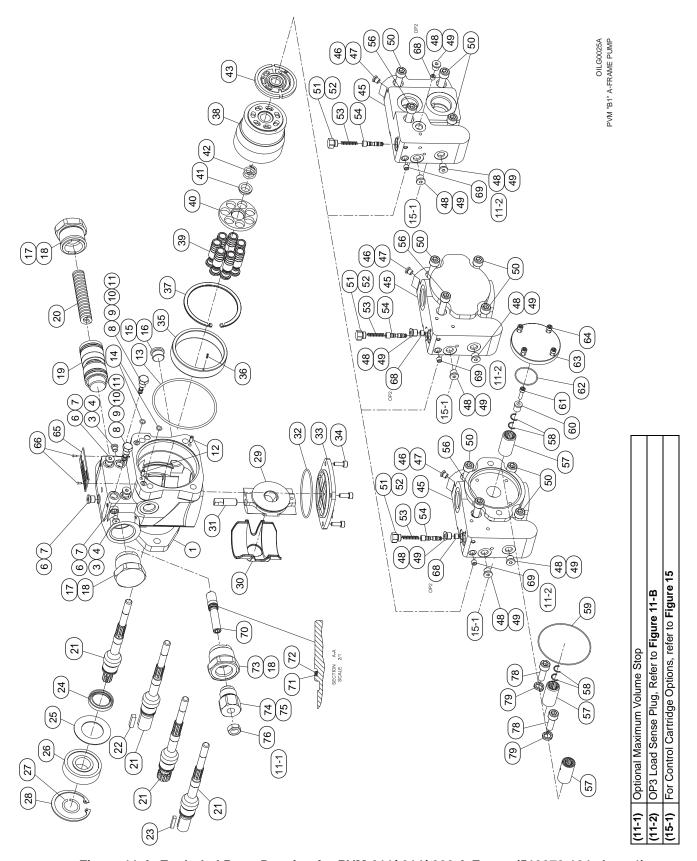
A. Exploded Parts Drawing for PVM-011/-014/-022 A-Frame (519272-104 sheet 1)
